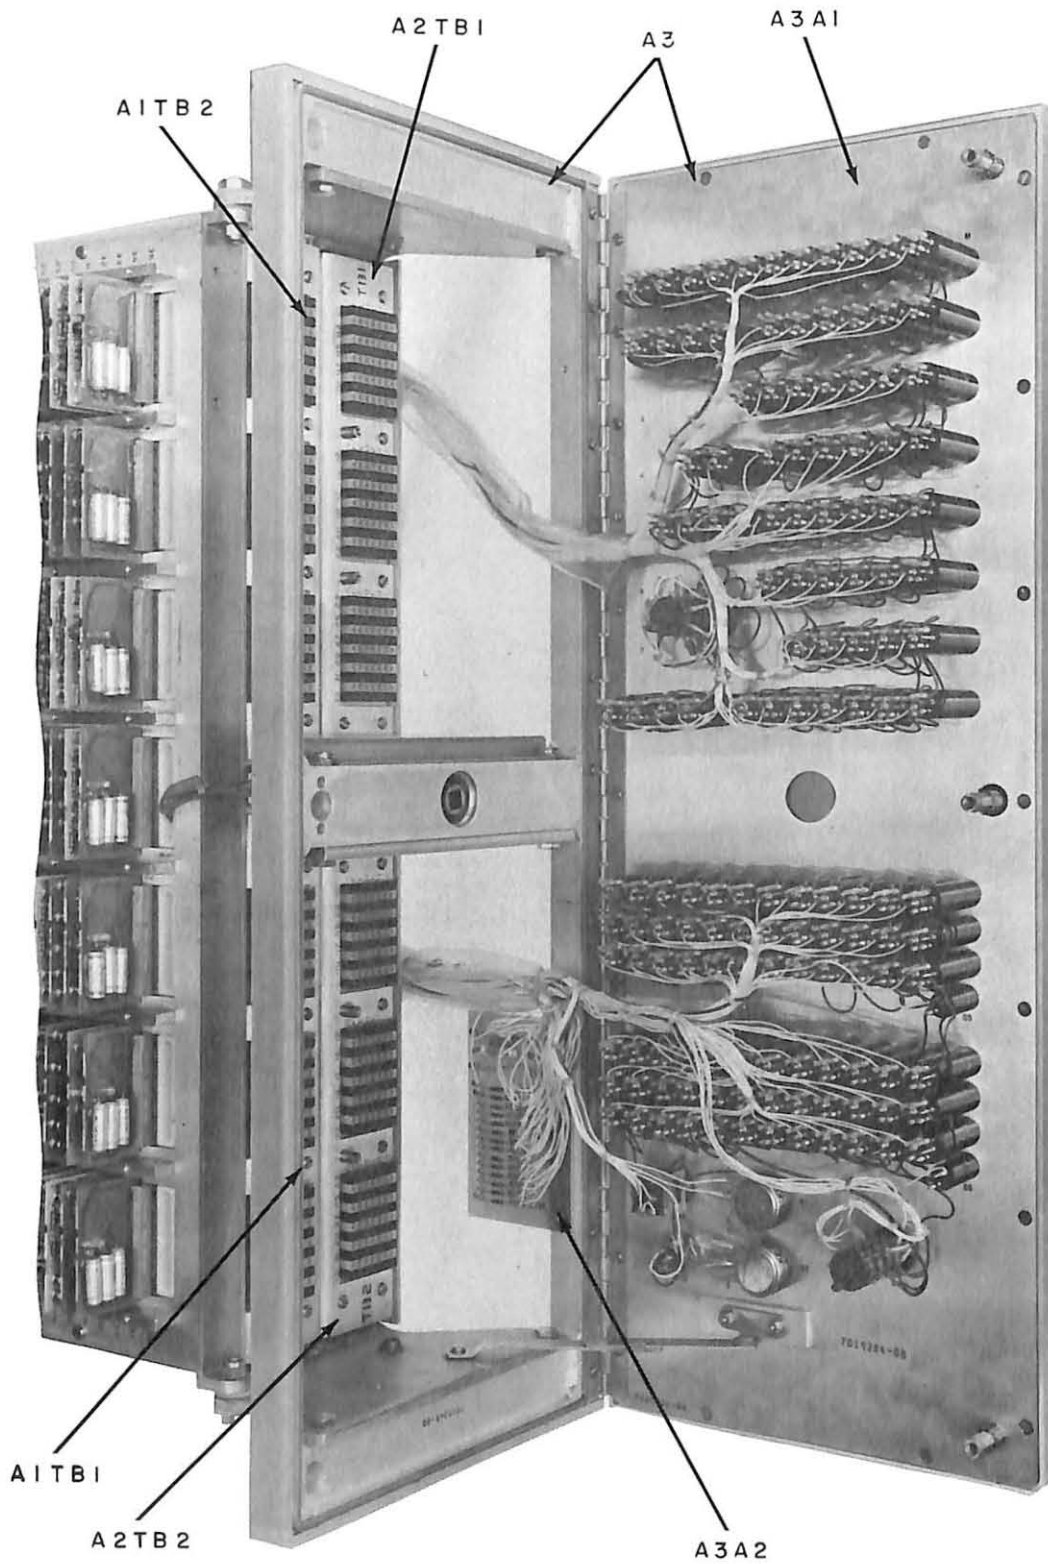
Drawer Assembly A12, Front End, Panel Open
